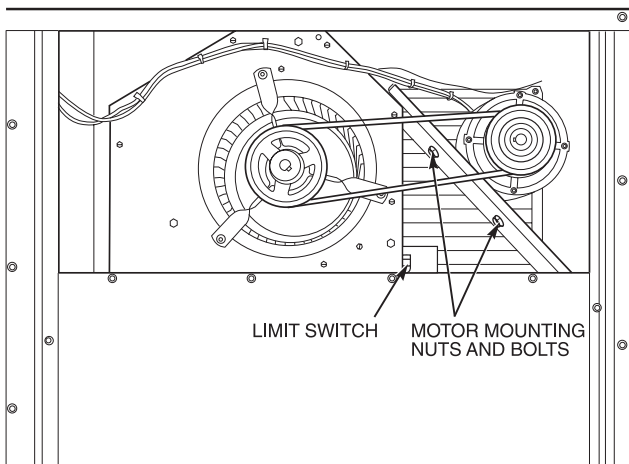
Typical Belt-Drive Motor Mounting for Sizes 090, 102
